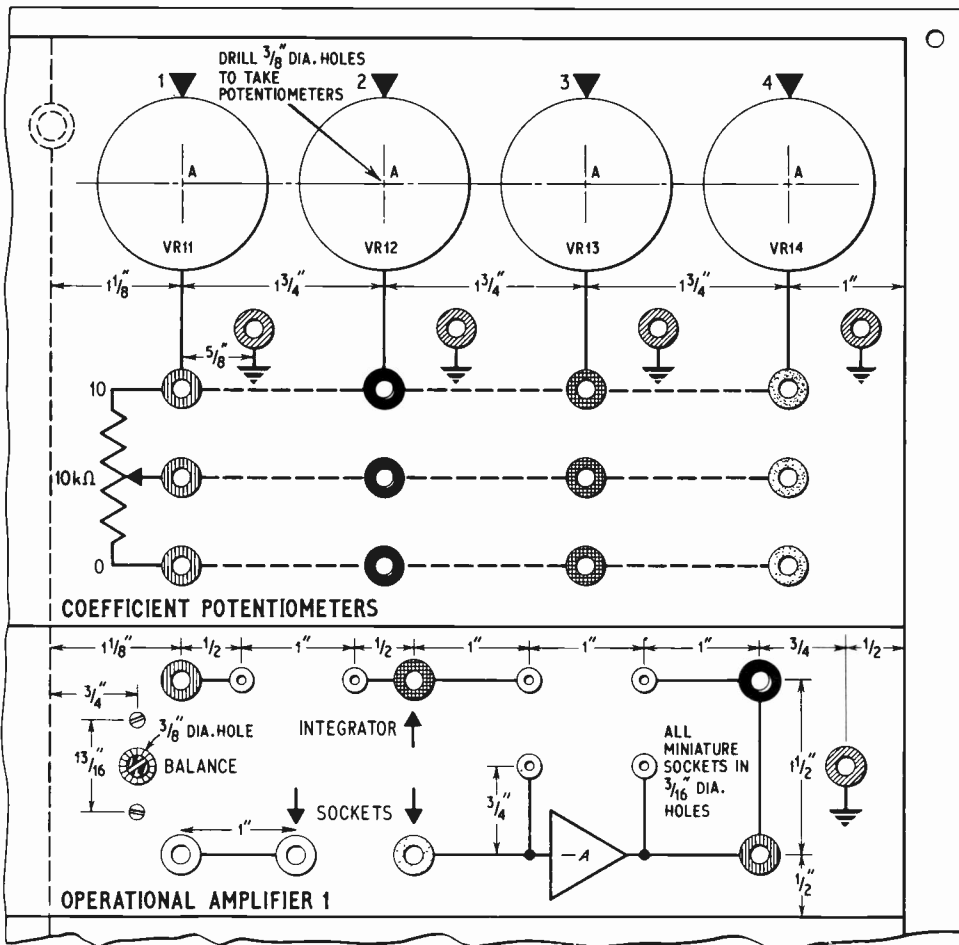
Right-hand portion of front panel. Drilling details, layout of components, and panel engraving. Below the broken line there are two further sections, each a replica of "Operational Amplifier 1"
